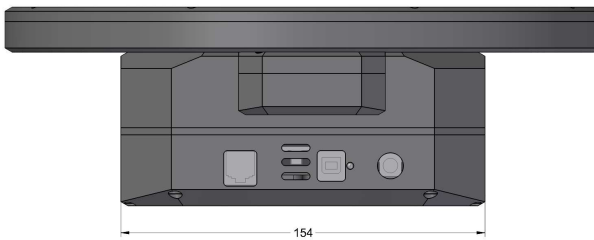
C4 camera head with External filter wheel bottom view dimensions
